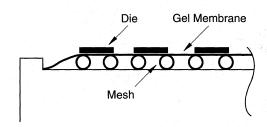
CROSS-SECTIONAL VIEW OF A GEL-PAK
